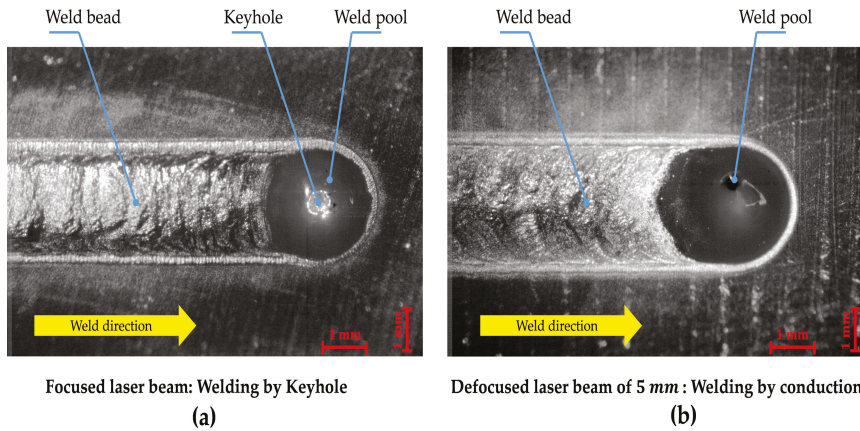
Two welding configuration (images of high-speed camera): (a) welding by keyhole; (b) welding by conduction ($P = 2.5 \text{ KW}$, $v = 600 \text{ mm}\cdot\text{min}^{-1}$).
